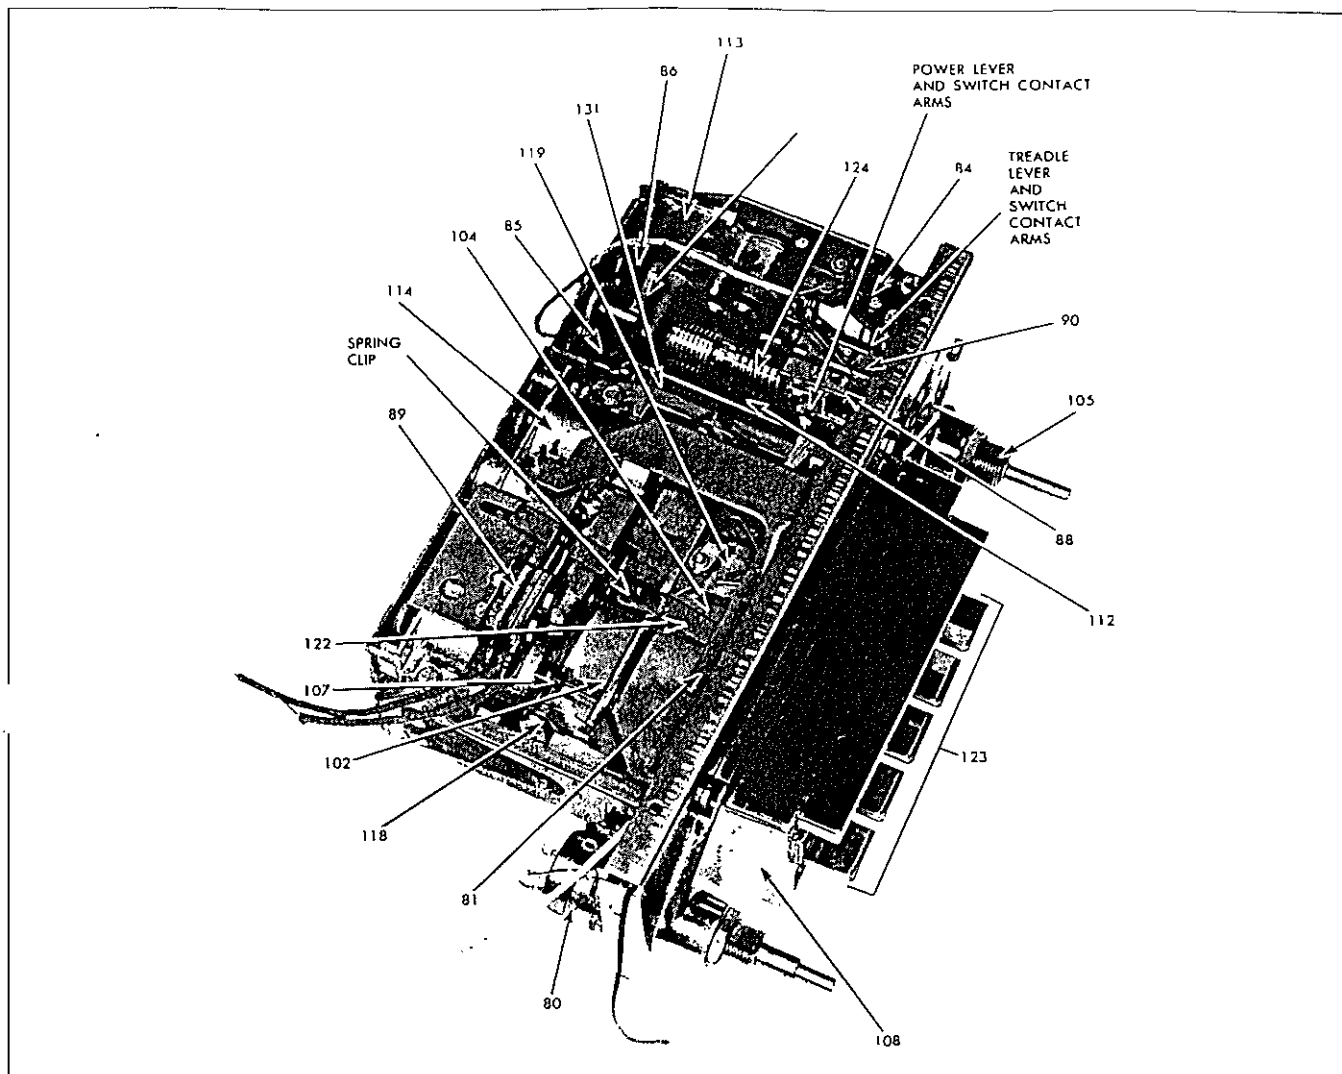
BOTTOM VIEW - TUNER - 987730 - RADIO
